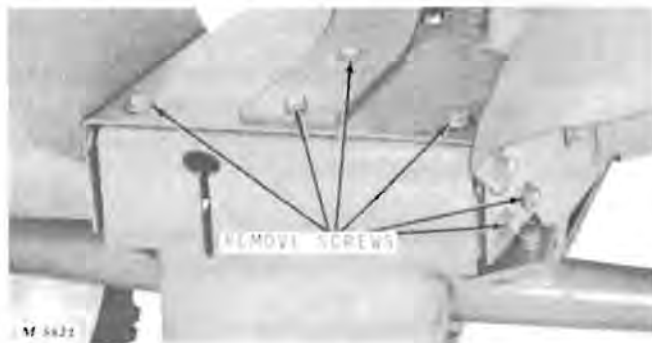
Removing 3-Speed Transaxle from Tractor Base
